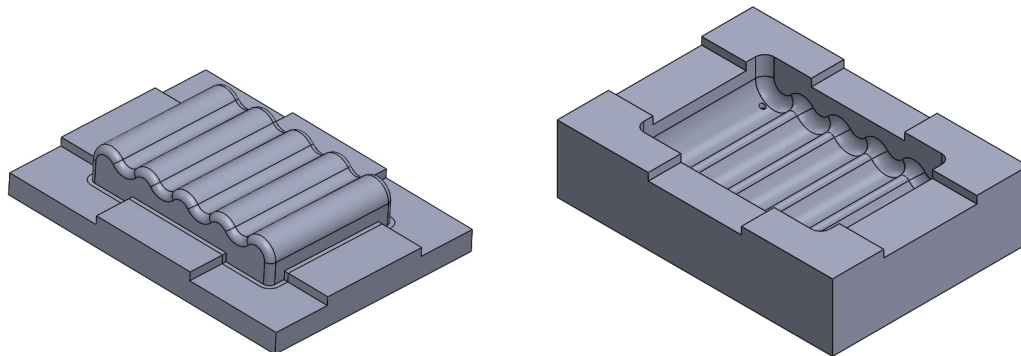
Core of the mold for manufacturing *Figure 21-3 Cavity of the mold for manufacturing
